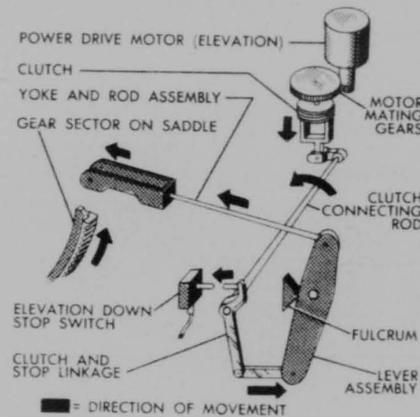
Schematic Drawing of Clutch Mechanism.
